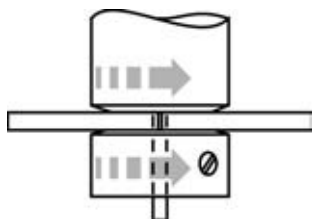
Schematic of the tool in the form of a bobbin (bobbin tool)
